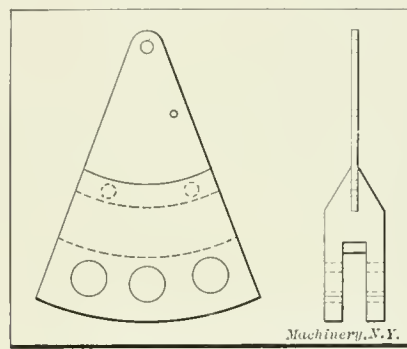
Die-cast Weight with Inserted Sheet-steel Punching
